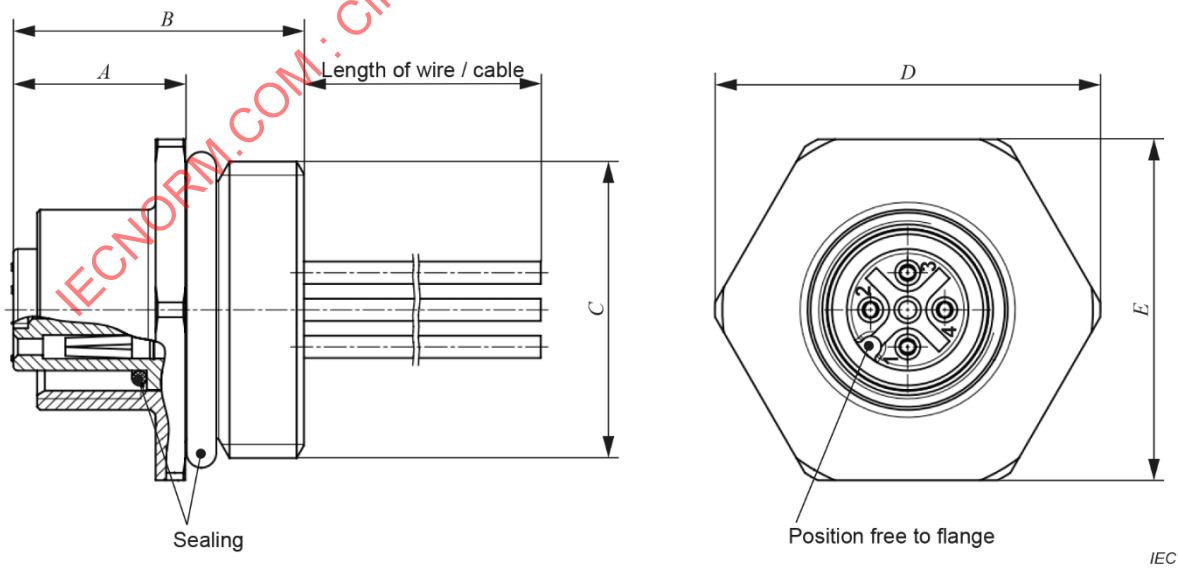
Fixed connector, female contacts, with wire / cable, single hole mounting thread M20 × 1,5
